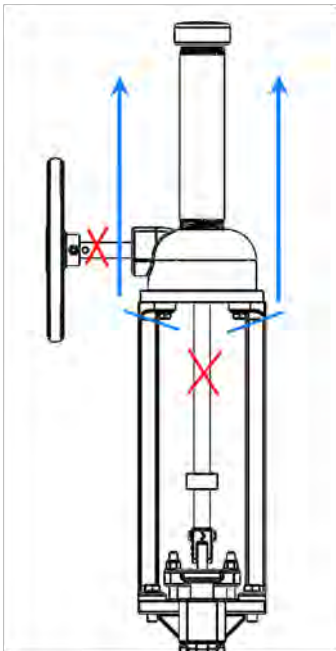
Knife Gate Valve with Bevel Gear Actuator, Vertical Lifting
